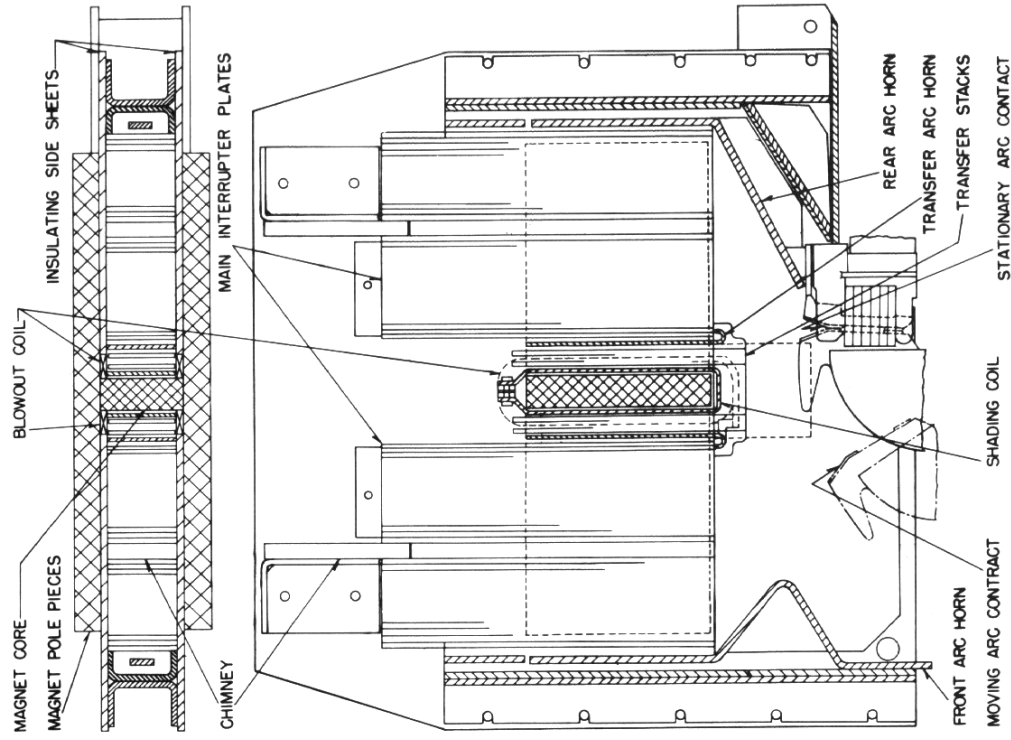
Schematic cross section of the 350 MVA arc chute showing component parts.
